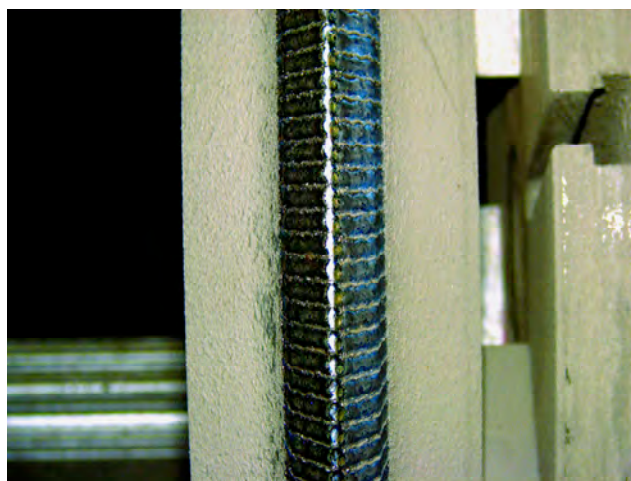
Close-up of the cutting edge of a coated disc cutter.
